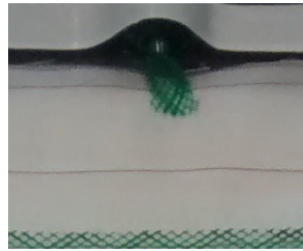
Tube with butyl wrapped around the end and distribution medium inserted into the tube opening.
